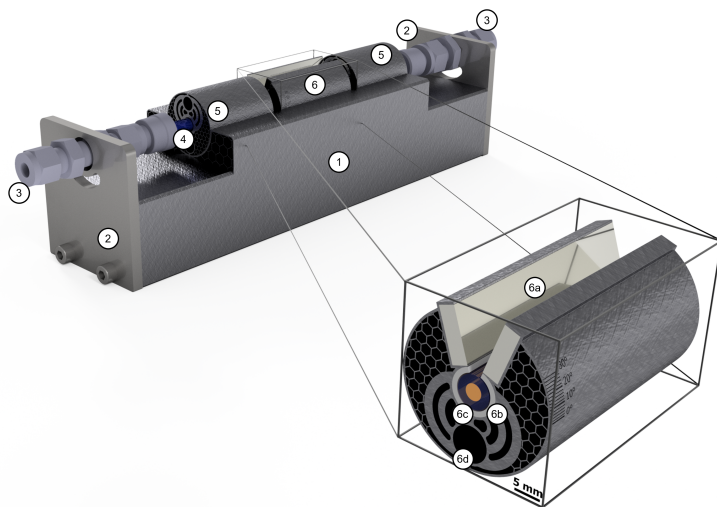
Rendering of a CAD model of the modular photoreactor assembly employed in this work. The assembly is made up of a 3D-printed reactor body (1), clamped between laser-cut front and back plates (2) onto a milled metal back bone structure (not visible). The commercial tubing connectors (3) hold a commercial 1/4" quartz glass capillary (4) in place that goes through the 3D-printed inlet and outlet heating drums (5) and a 3D-printed and heated optics module (6). The optics module (zoom in) comprises commercial mirror insets (6a) that shape a narrowing gap concentrator guiding incident light into a silver coated cavity (6b) in which the quartz glass tube surrounds the reaction volume depicted in orange (6c). Heating in the inlet and outlet heating drums and the optics module is realized via electrical heating cartridges (not depicted) in foreseen heating cartridge bores (6d).
